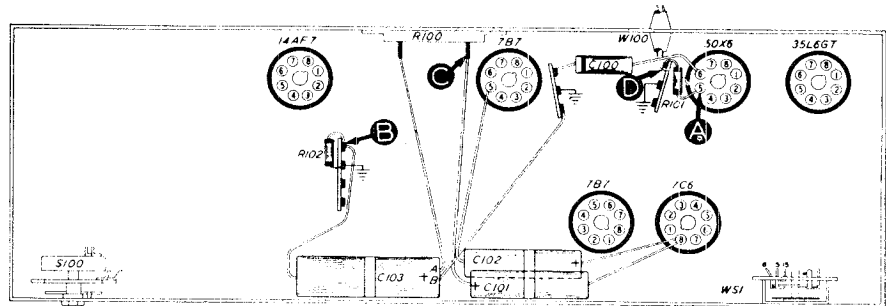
Bottom View, Showing Section 1 Test Points TP-3395A
